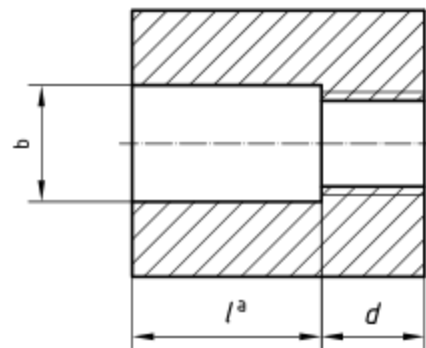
Measuring device for verifying run-out specified in Figures 42 and 43
